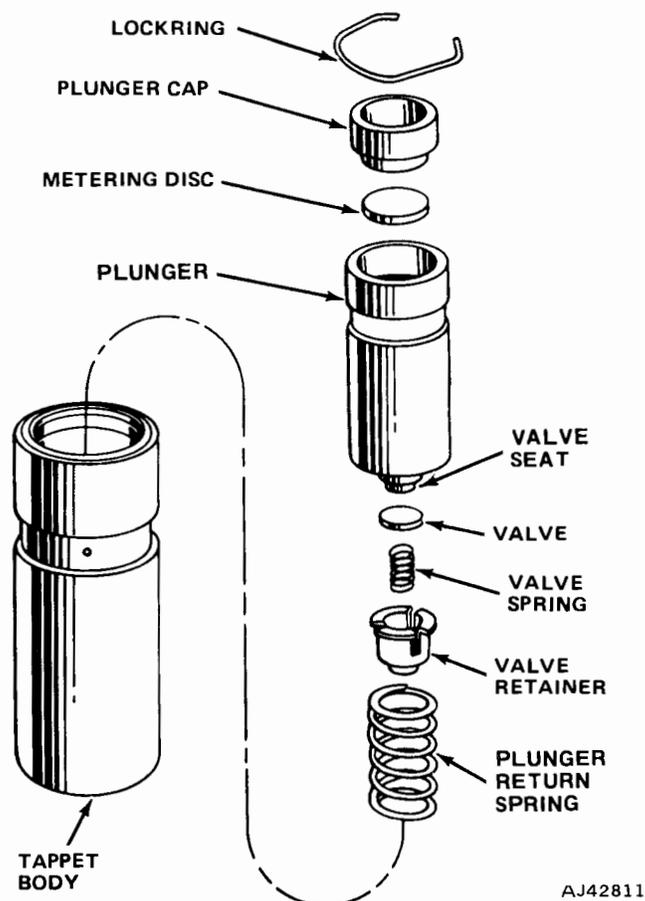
B-16 Typical Hydraulic Tappet Assembly
